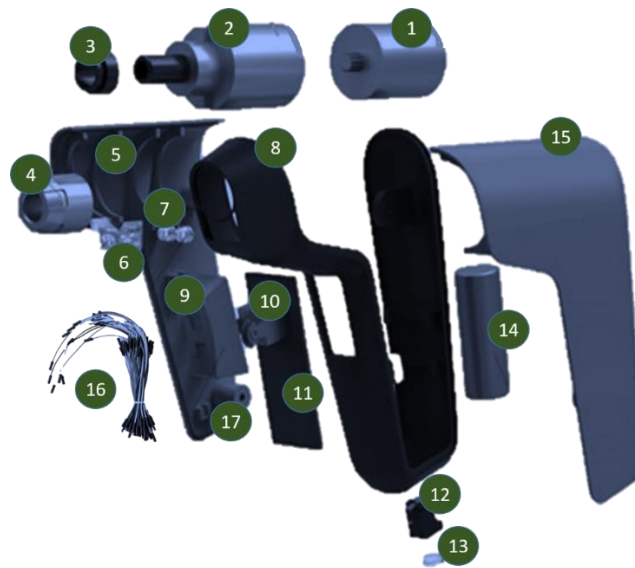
Exploded view of a pocket driller (source: Simon Fredriksson, with modifications)
